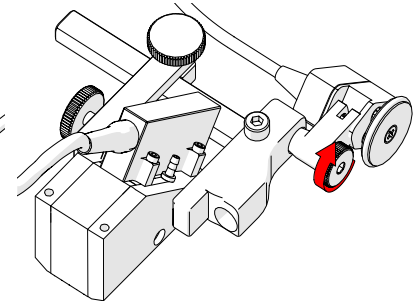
Tighten pivot knob and follow steps 2.2.
